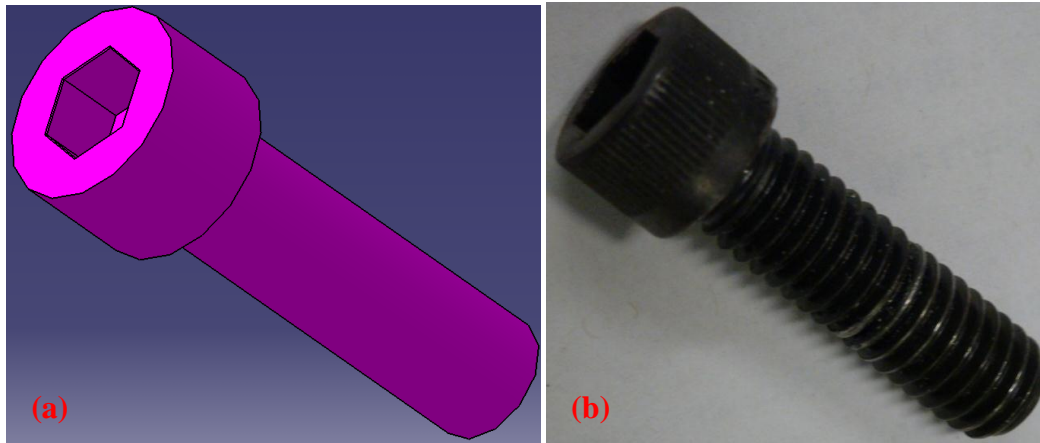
(a) CAD model and, (b) photograph of a socket head cap screw
